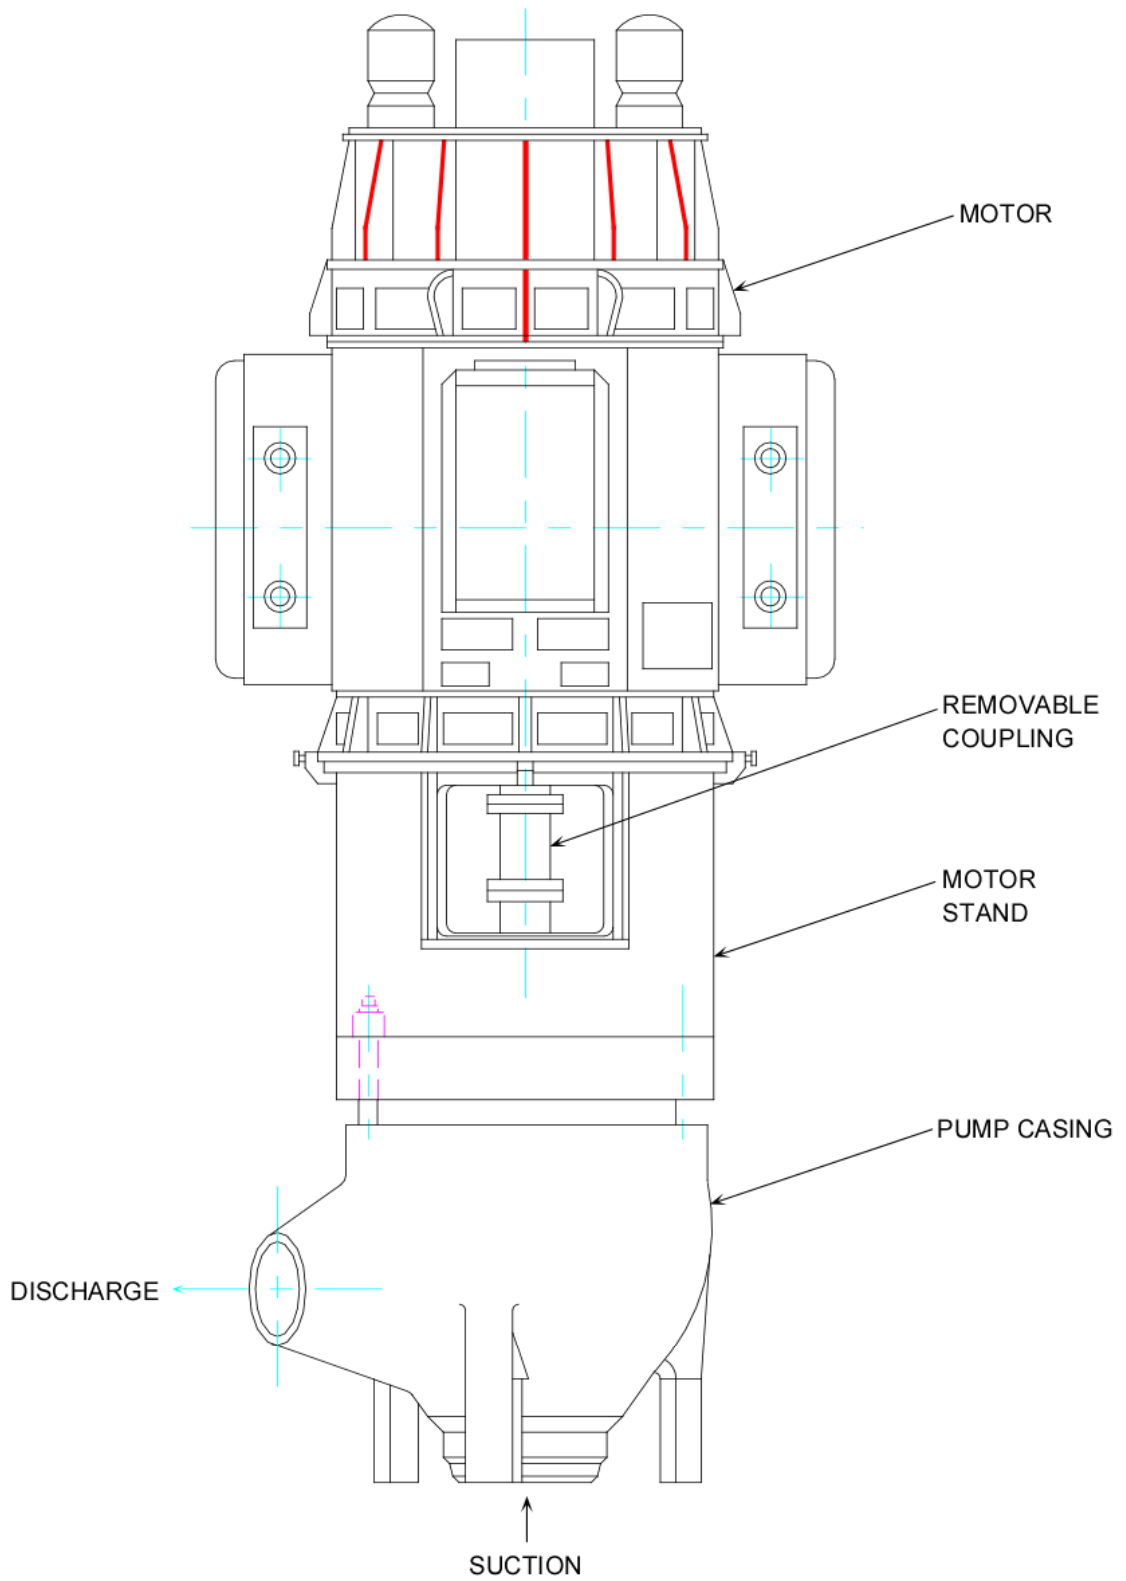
Reactor Coolant Pump and Motor Assembly
